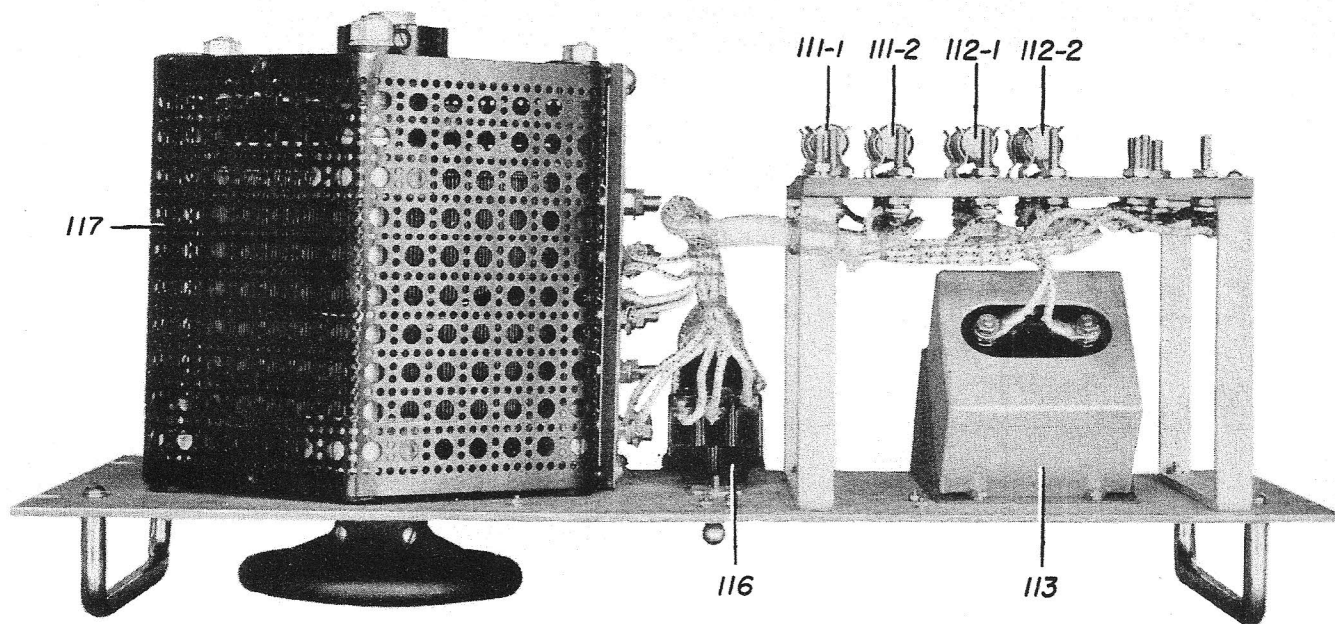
Power Control Panel PN-13-A, and PN-13-B, Bottom View
